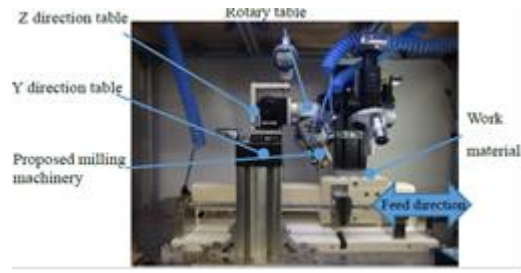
Experimental apparatus using an aerostatic guideway for cutting a workpiece
